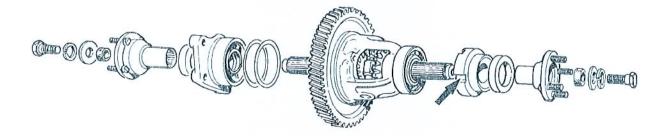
Exploded view of differential assembly – automatic transmission (Sec 5) Arrow shows alignment slot in the spacer
